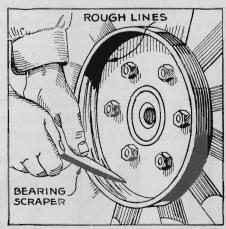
Tool's marks on braking surface of drum cause pounding. Polishing ends it.
